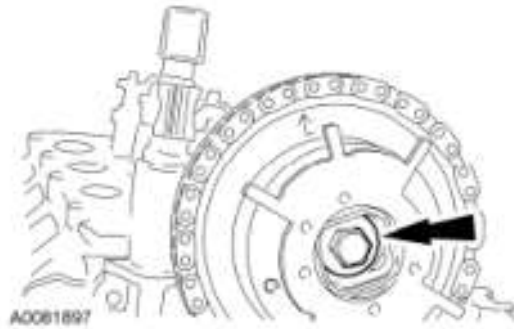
Locating Camshaft Phaser And Sprocket Bolt
